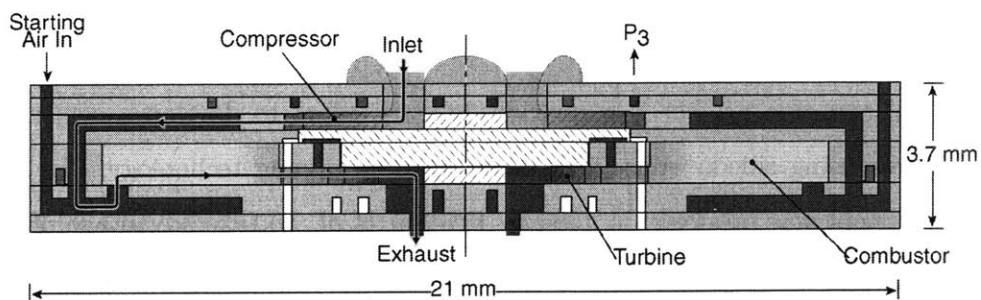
Schematic of the cross-sectional view of a microengine design. Flow enters through the top wafer, passes rotor and flow radially outward, enters the combustion chamber from the bottom, combusts, and exits the bottom after passing the turbine.
